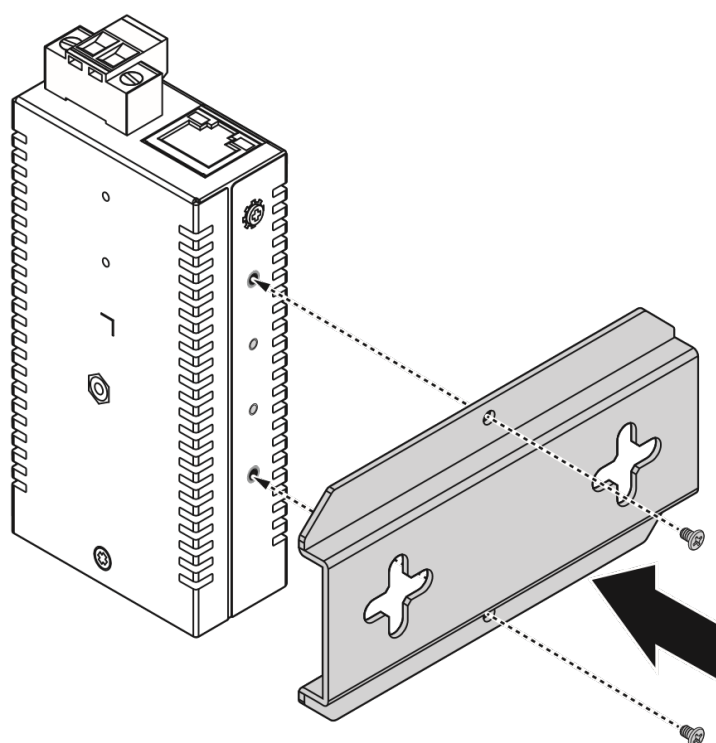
Installing Wall Mount Plates (EKI-1211 Series)
